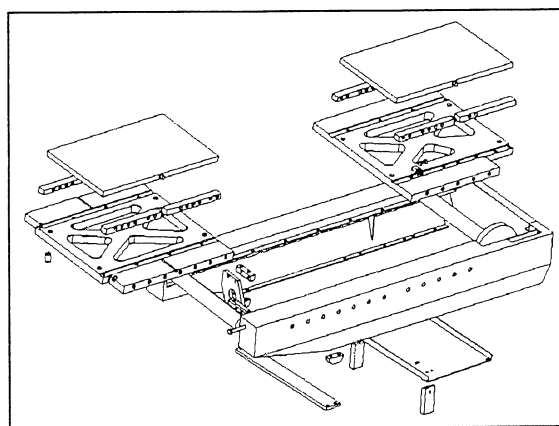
Exploded View of the Prototype FMT (Belt Removed)
